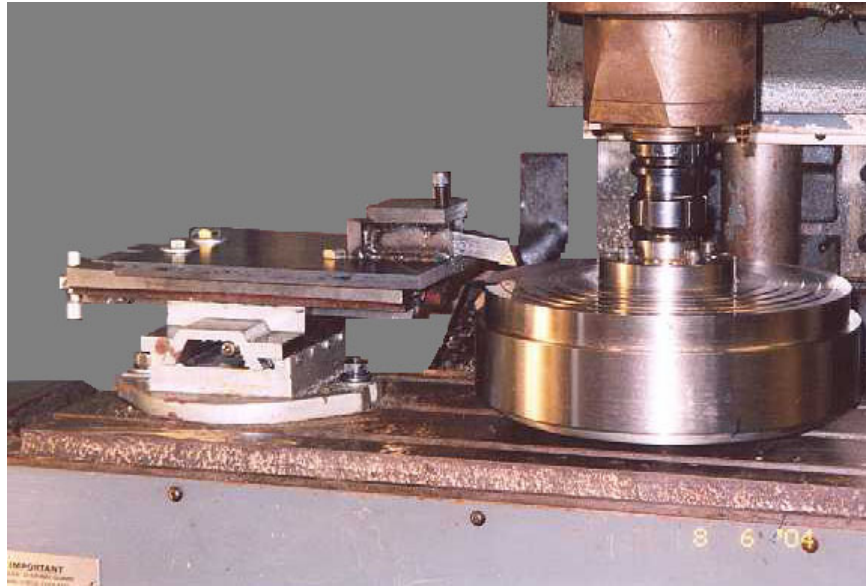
Photograph of the set-up used for machining the top and side surface of the spindle
